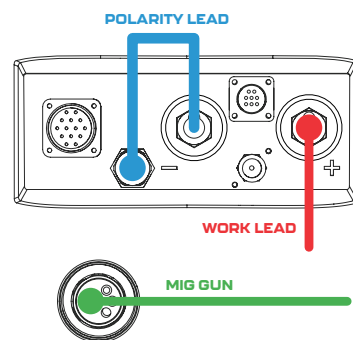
Setup for MIG Welding with Gasless MIG Wire
